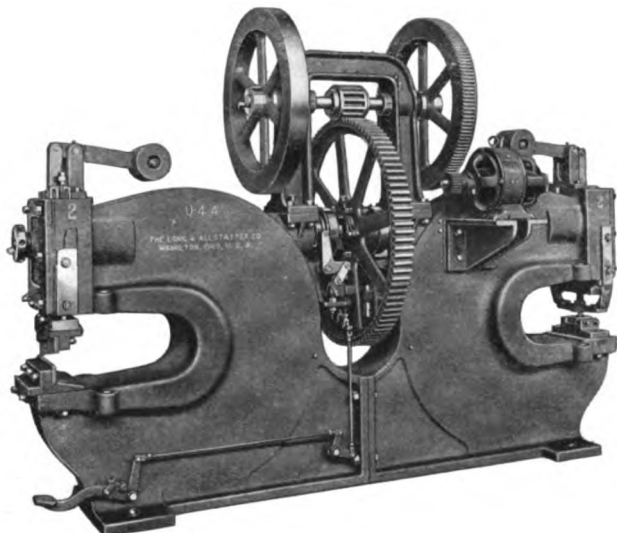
No. 2 Double Machine, 24-Inch Throats
